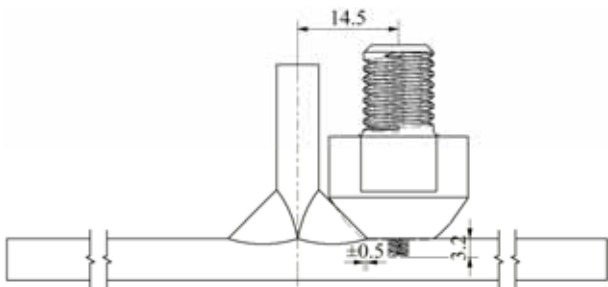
Schematic representation of weld/tool relative position (dimensions in mm).
